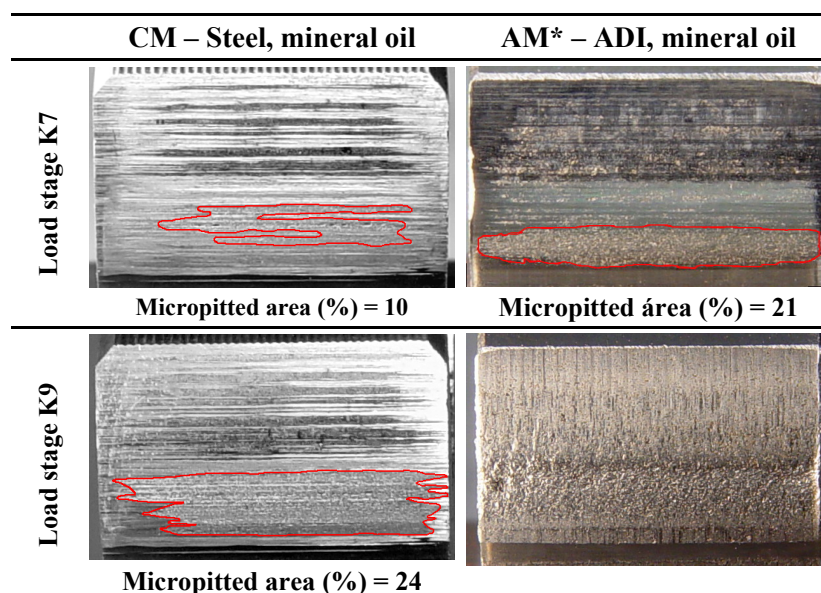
Pictures of ADI and steel (CM, AM*) pinion tooth flanks after standard load stages of gear micropitting tests.
